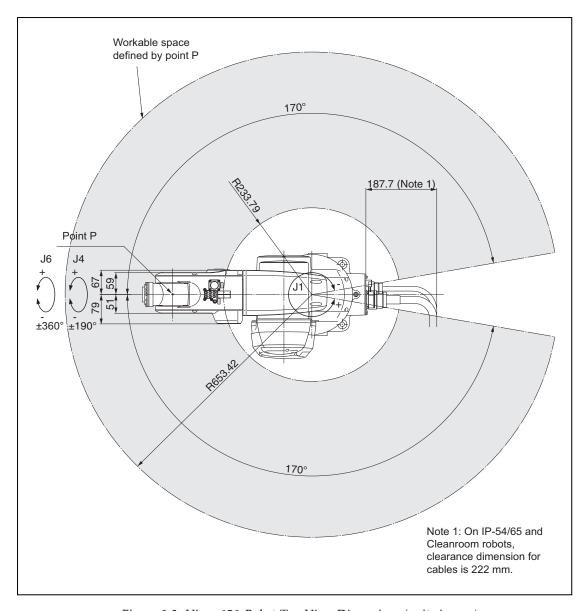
Viper 650 Robot Top View Dimensions (units in mm)
